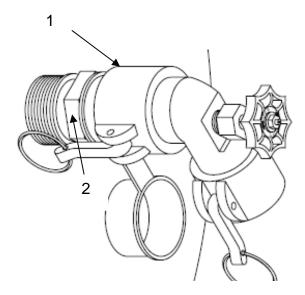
Valve coupler attached to the adapter assembly with cam arms in the unlocked position.
